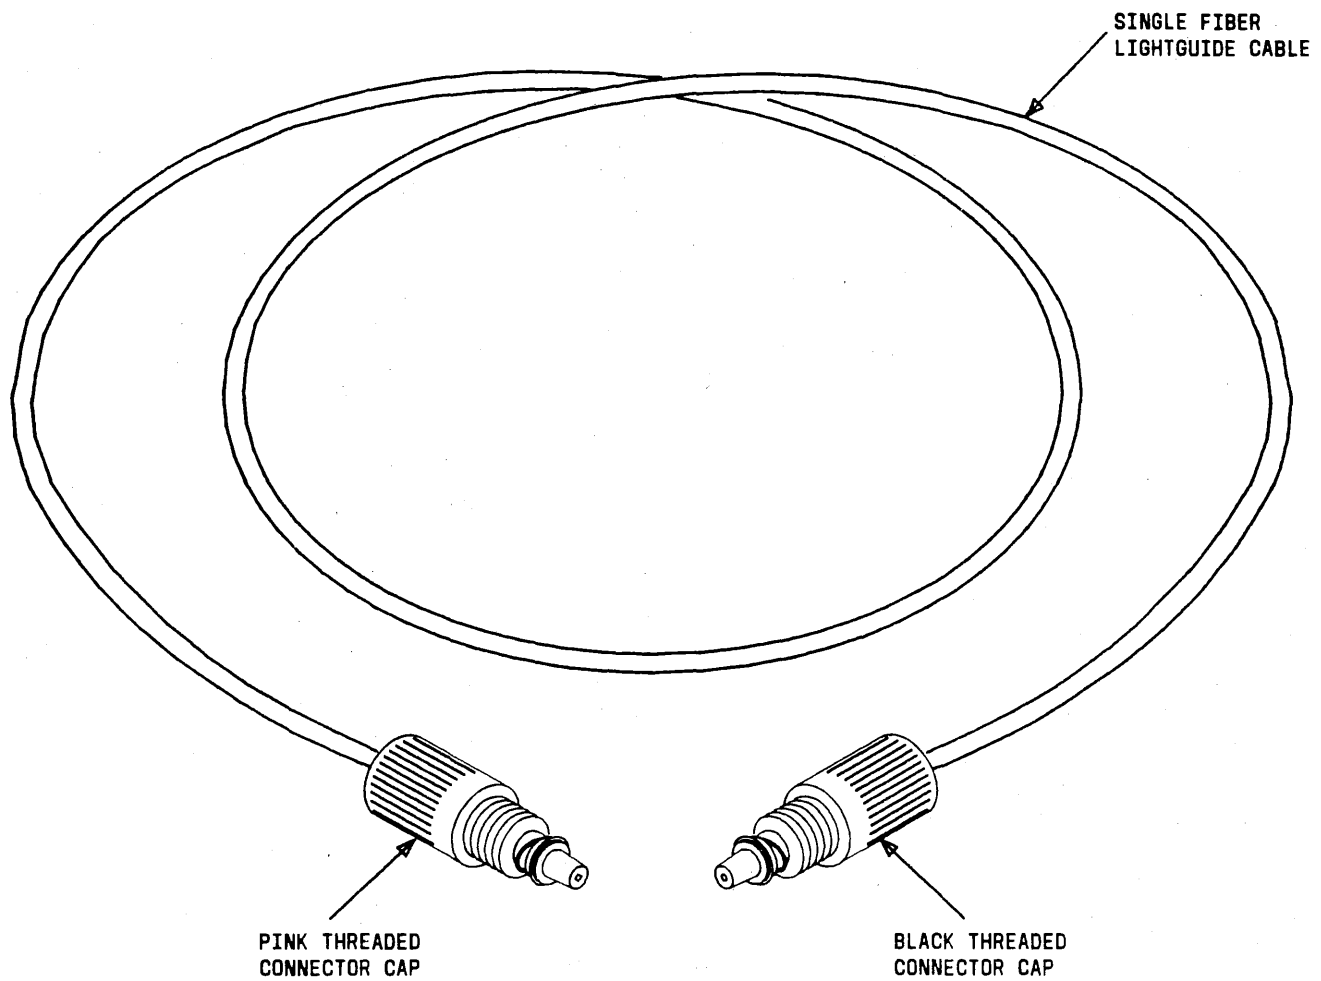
LA1A-D Cable-Type Lightguide Build-Out
